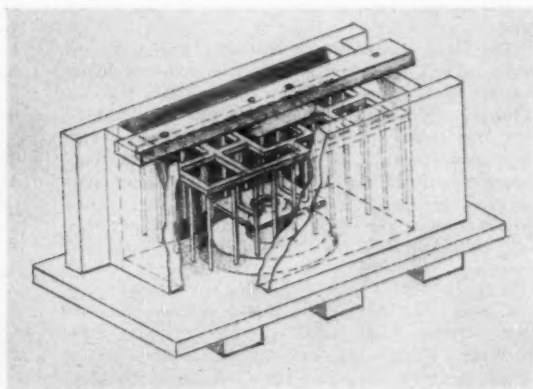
(left)—Cutaway drawing showing details of the gray iron still casting. Soundness is required to withstand service pressures. Poured weight, 3300 lb; cleaned weight, 3060 lb. Metal composition: total carbon, 3.0-3.5 per cent; Si, 1.75-2.25; Mn, 0.6-1.0 S, 0.1 max; P, 0.25 max.
